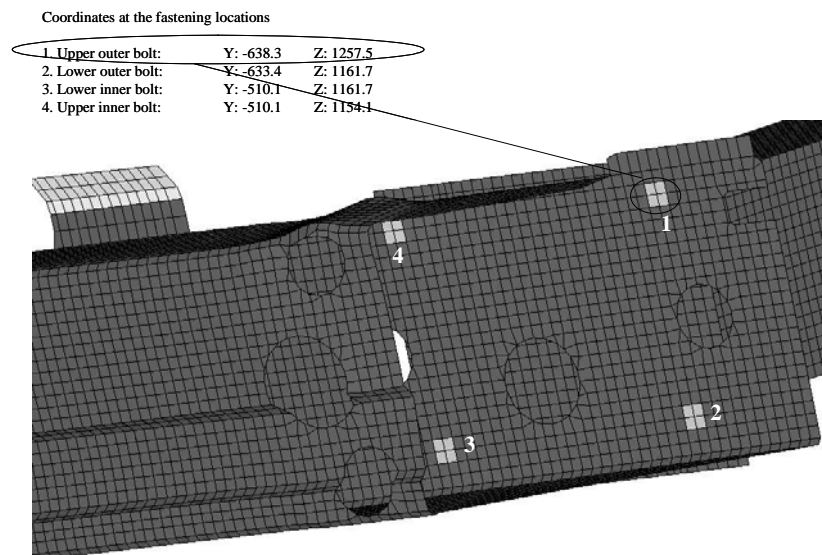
Modelling of bolted connection between the bumper beam back face and the interface plate.
